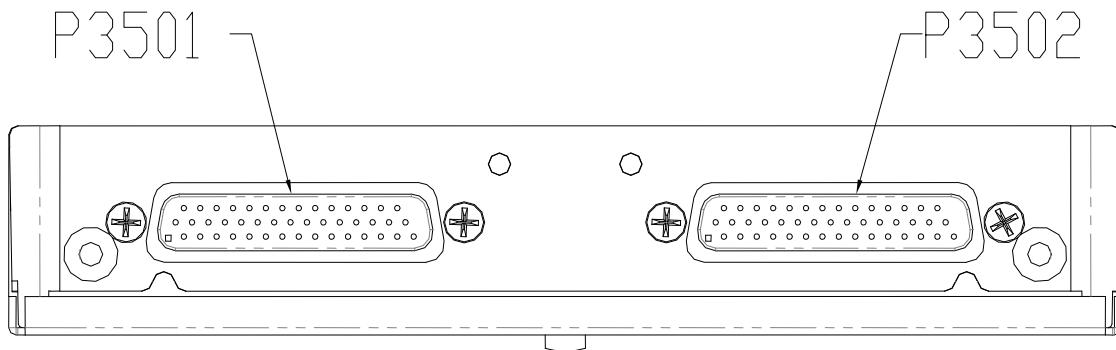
GMA 35 Connector Layout Detail - Rear View
